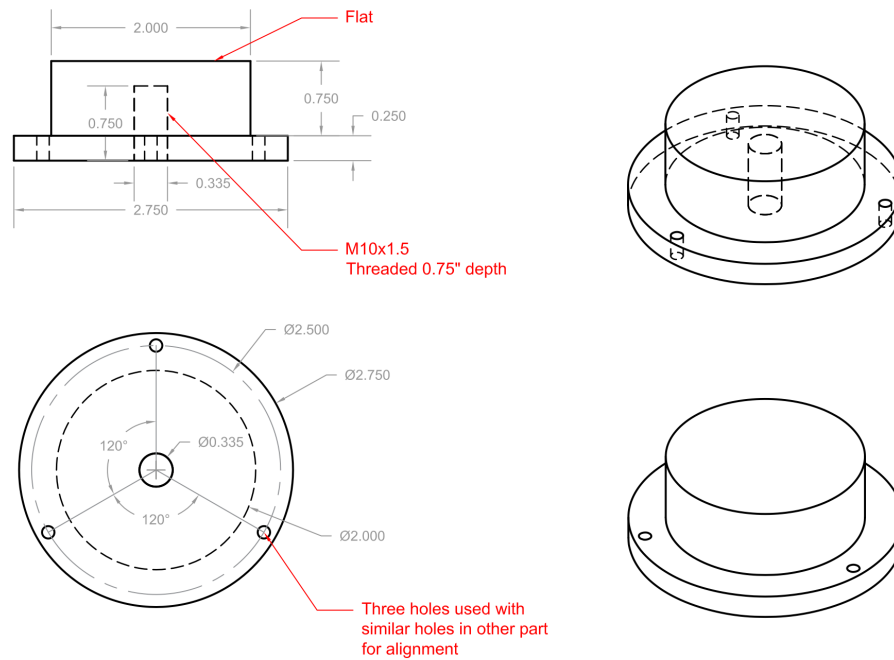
Stainless-Steel Mold. Top piece of the poker-chip mold (all dimensions in inches)
